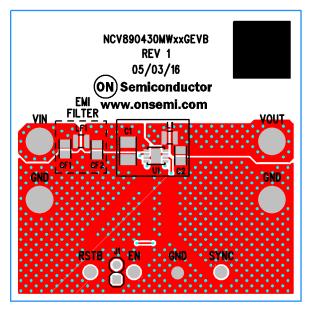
NCV890430MWxxGEVB PCB Layout - Top
